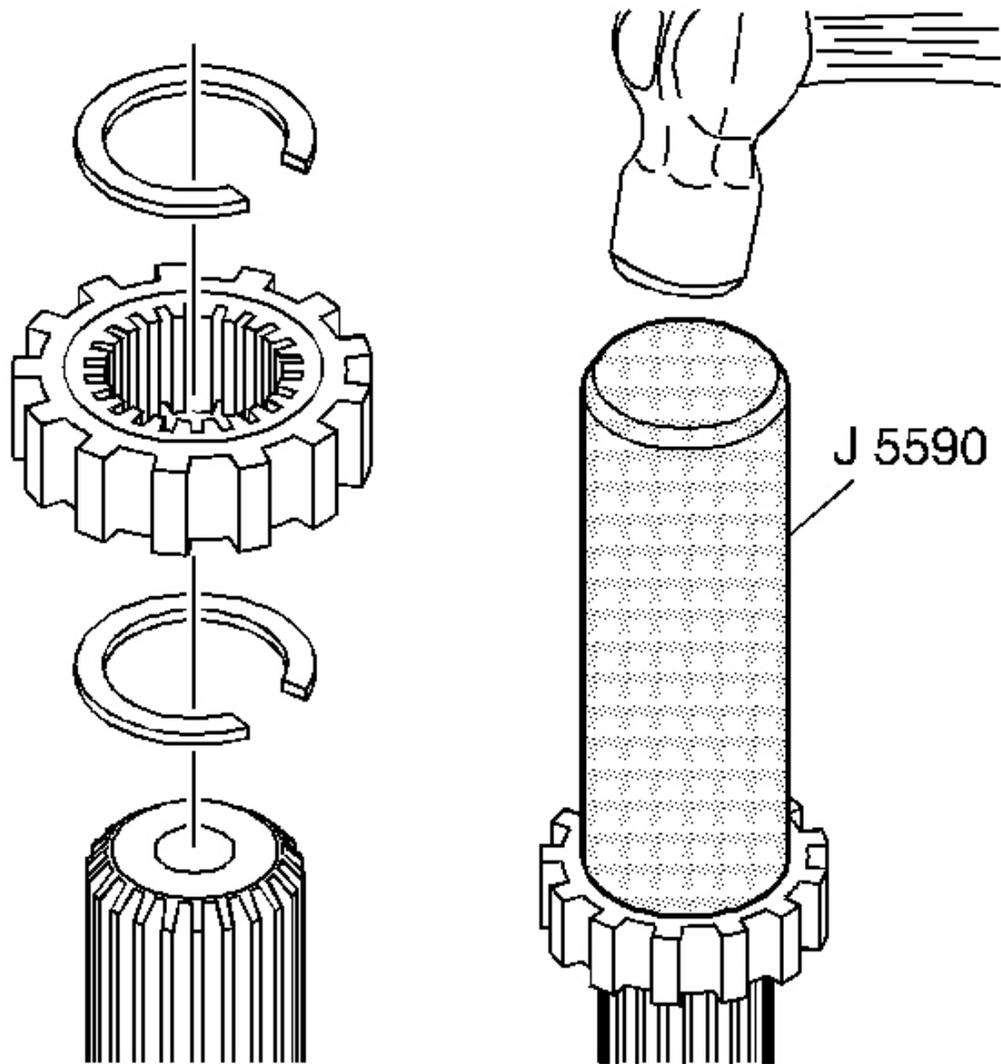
Installing Speed Sensor Reluctor Wheel & Retainer Ring Using J 5590
